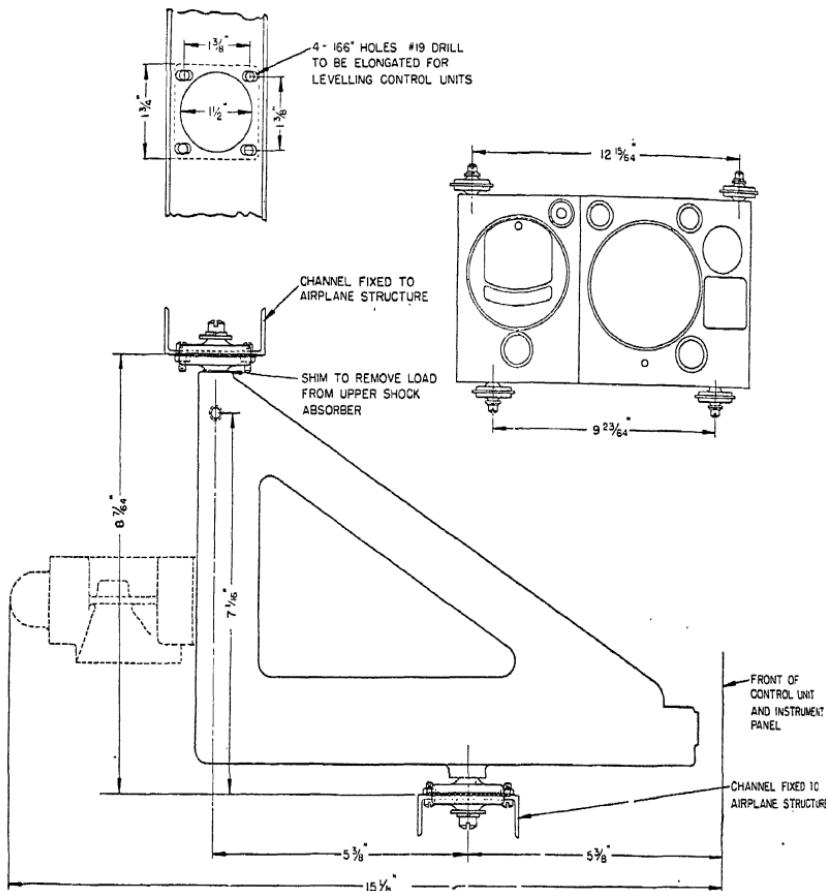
Cross-Section of Mounting Unit Showing how to Attach the Shock-Absorbers
